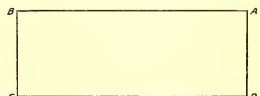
METHOD FOR WELDING A SQUARE SHEET OR PATCH
